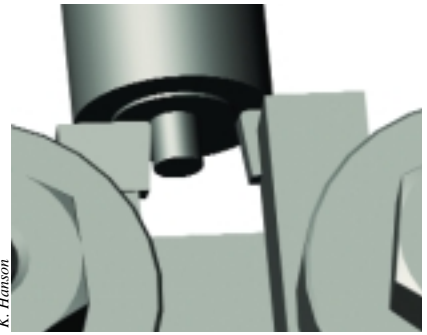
Balance turning involves making a single pass with roughing and finishing tools.
